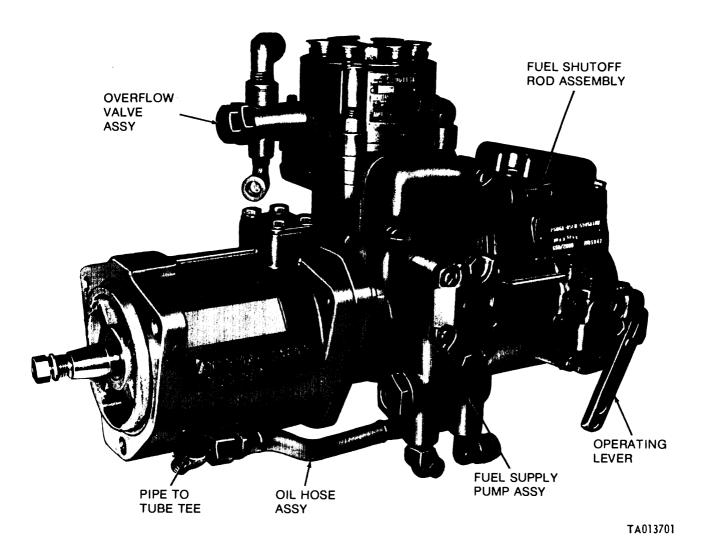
Metering and distributing fuel injection pump assembly (late code G), left front view.
